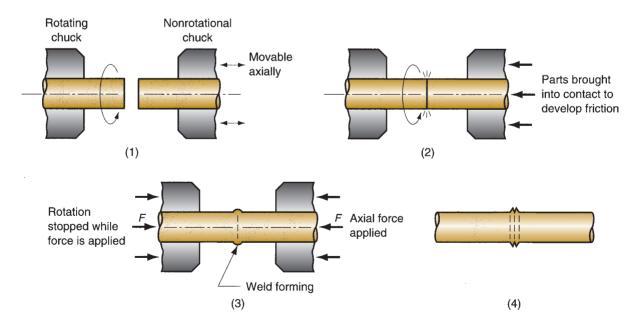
Friction welding (FRW): (1) rotating part, no contact; (2) parts brought into contact to generate friction heat; (3) rotation stopped and axial pressure applied; and (4) weld created.
